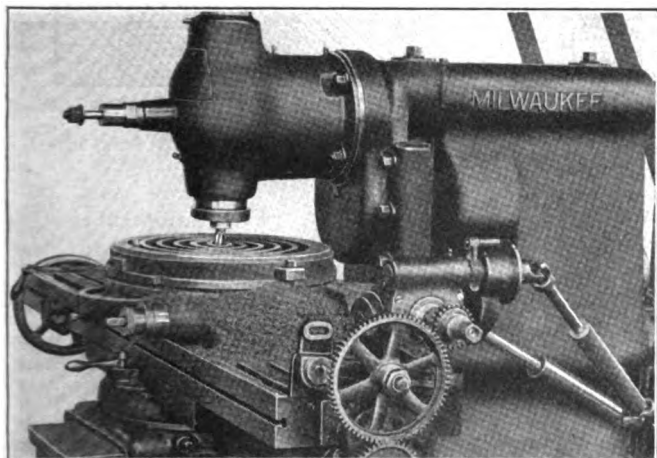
MACHINE SET-UP FOR MILLING THE SCROLL
